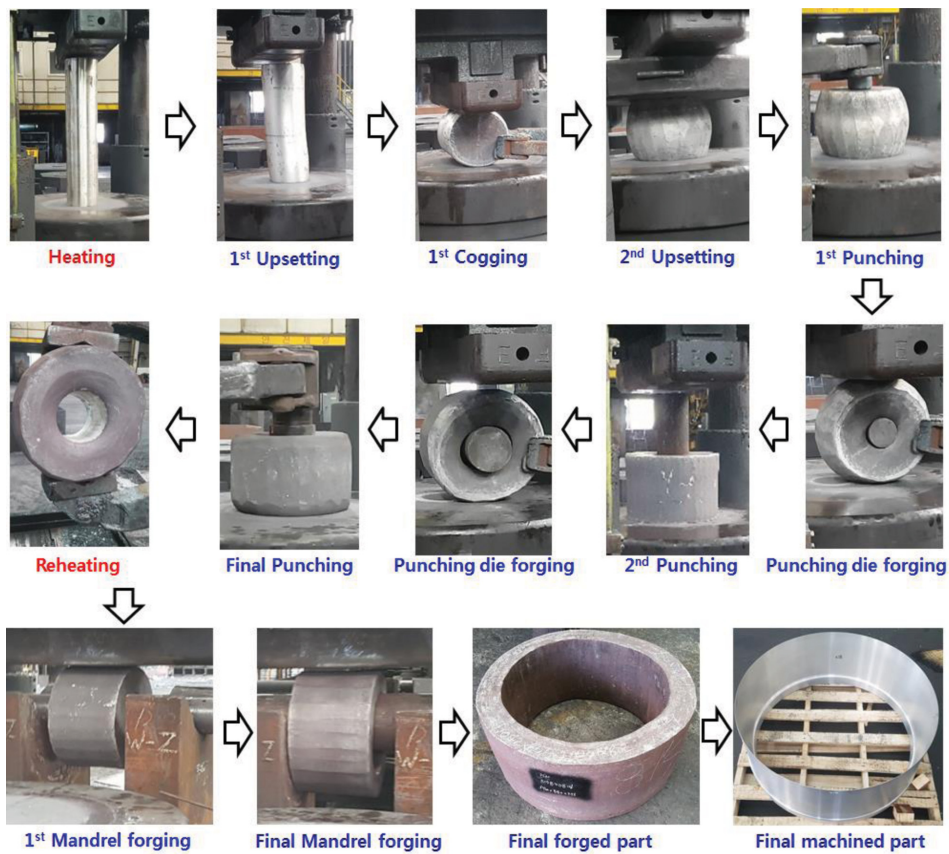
Prototype manufacturing process of blade cylinder root by suggested forging method
